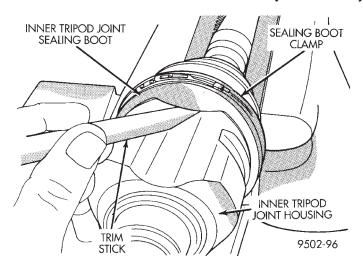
Trim Stick Inserted for Venting Tripod Joint
